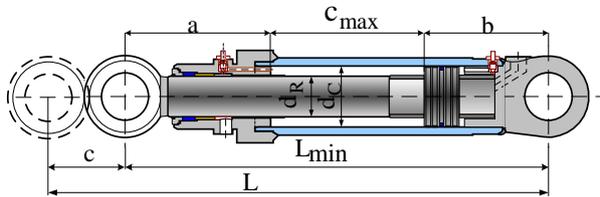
The main kinematic dimensions of a hydraulic cylinder hinged at both ends
